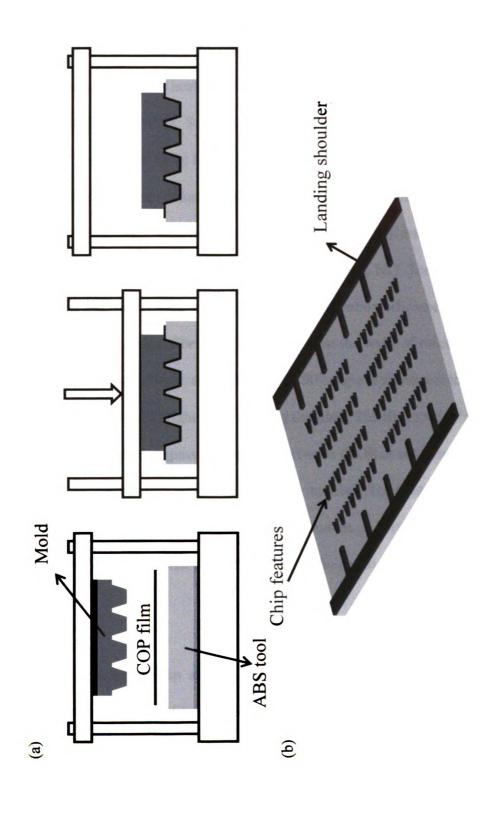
Method for hot embossing of the thin film polymer chips. (a) Schematic of the hot embossing process using a moldable counter tool. (b) Rendering of the embossing mold with landing shoulder around the length of the mold.
